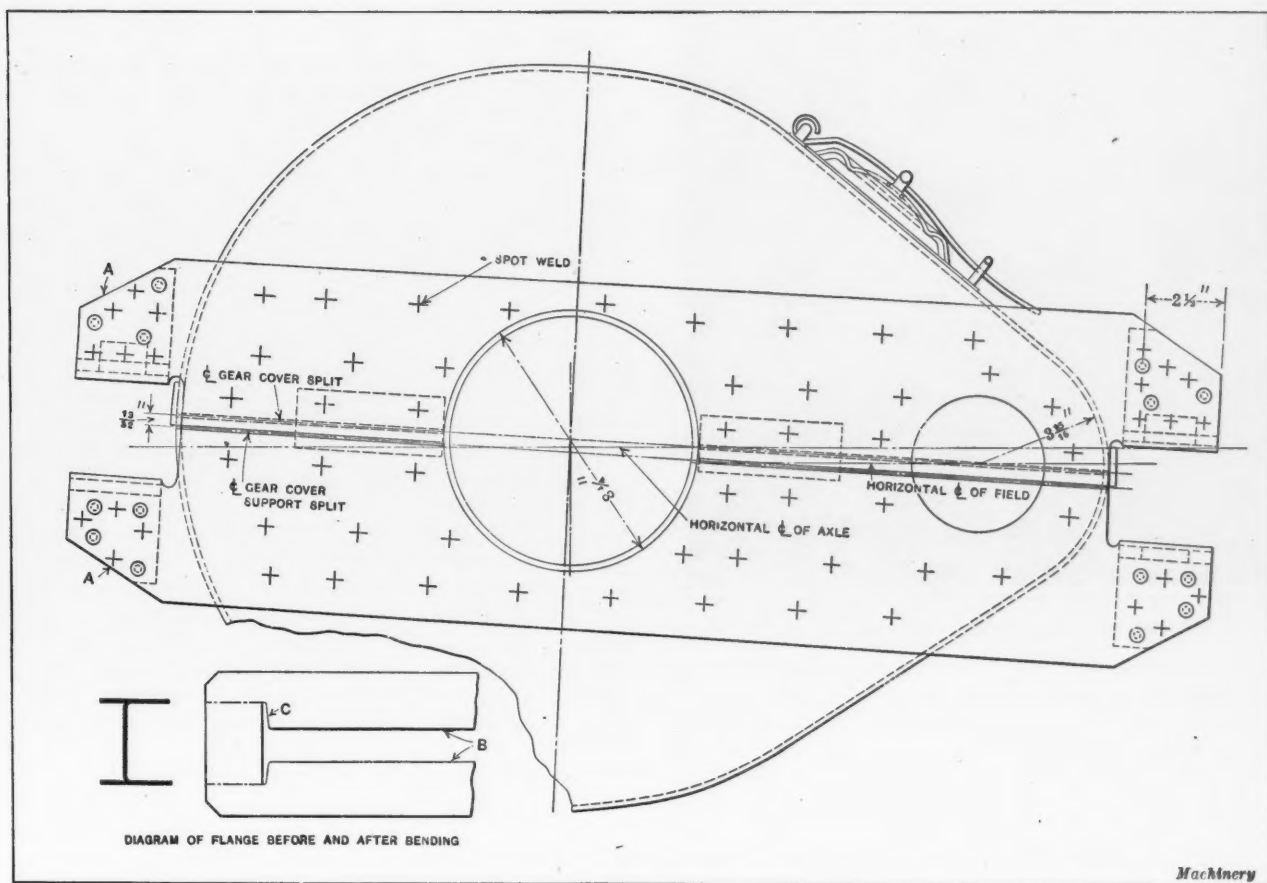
Sheet-steel Gear Cover for Electric Railway Motors, and Development of the Flange before forming
